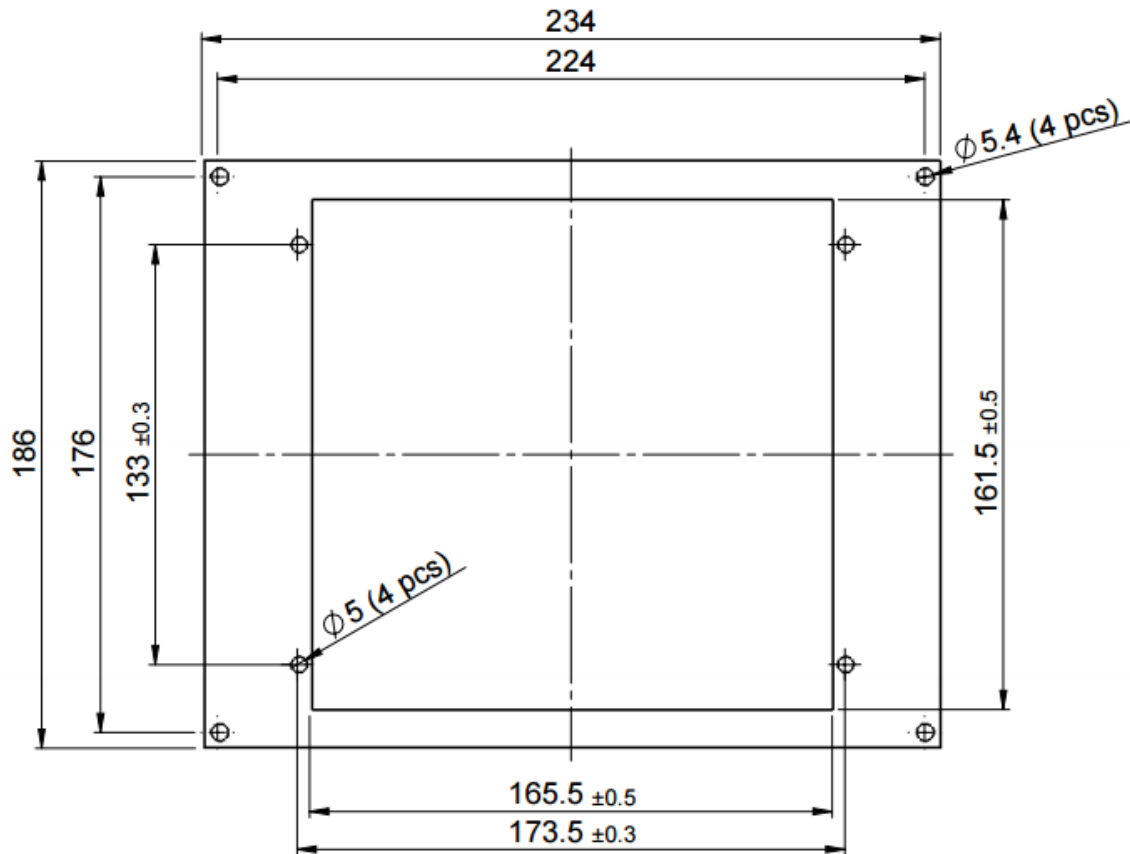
Dimensional drawing for REF615 cover plate for change from SPAC 310C.
